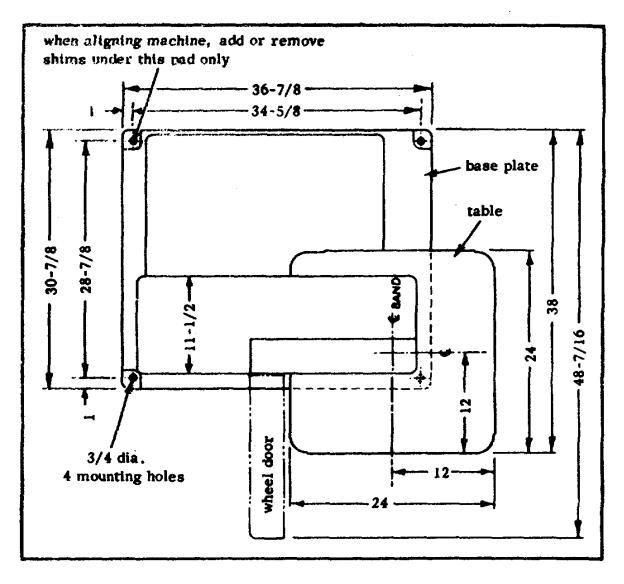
Top view, showing dimensions and mounting bolt holes.
